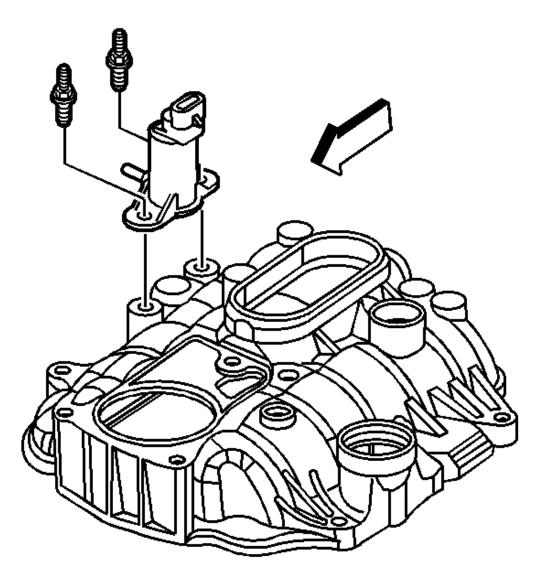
View Of EVAP Canister Purge Solenoid Valve Courtesy of GENERAL MOTORS CORP.
